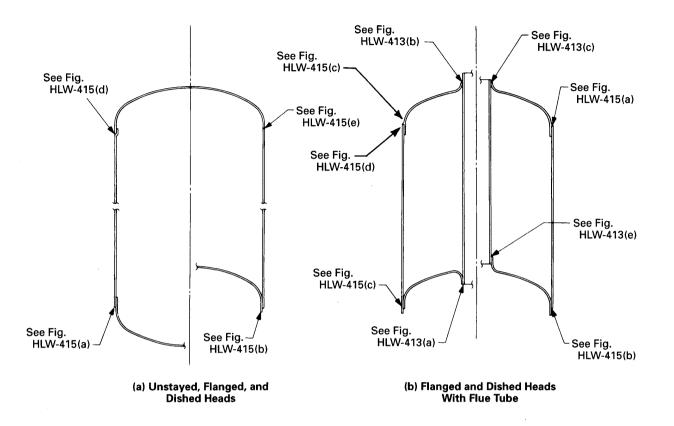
TYPICAL WATER HEATER WELDED JOINTS
